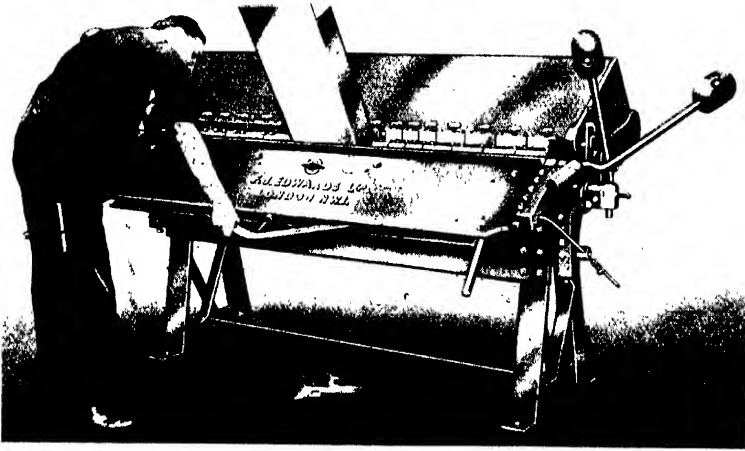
PAN OR TRAY FOLDING MACHINE (*F. J. Edwards, Ltd.*)
